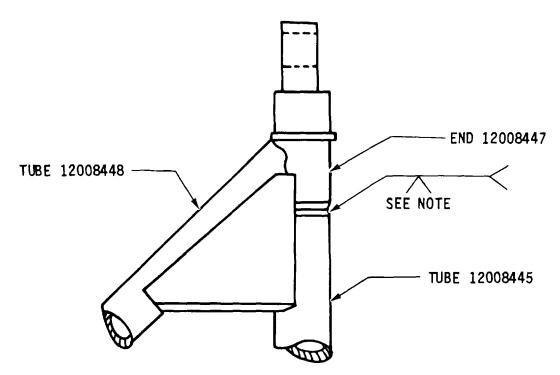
Repair welding procedure for tube 12008448 to end 12008447.
